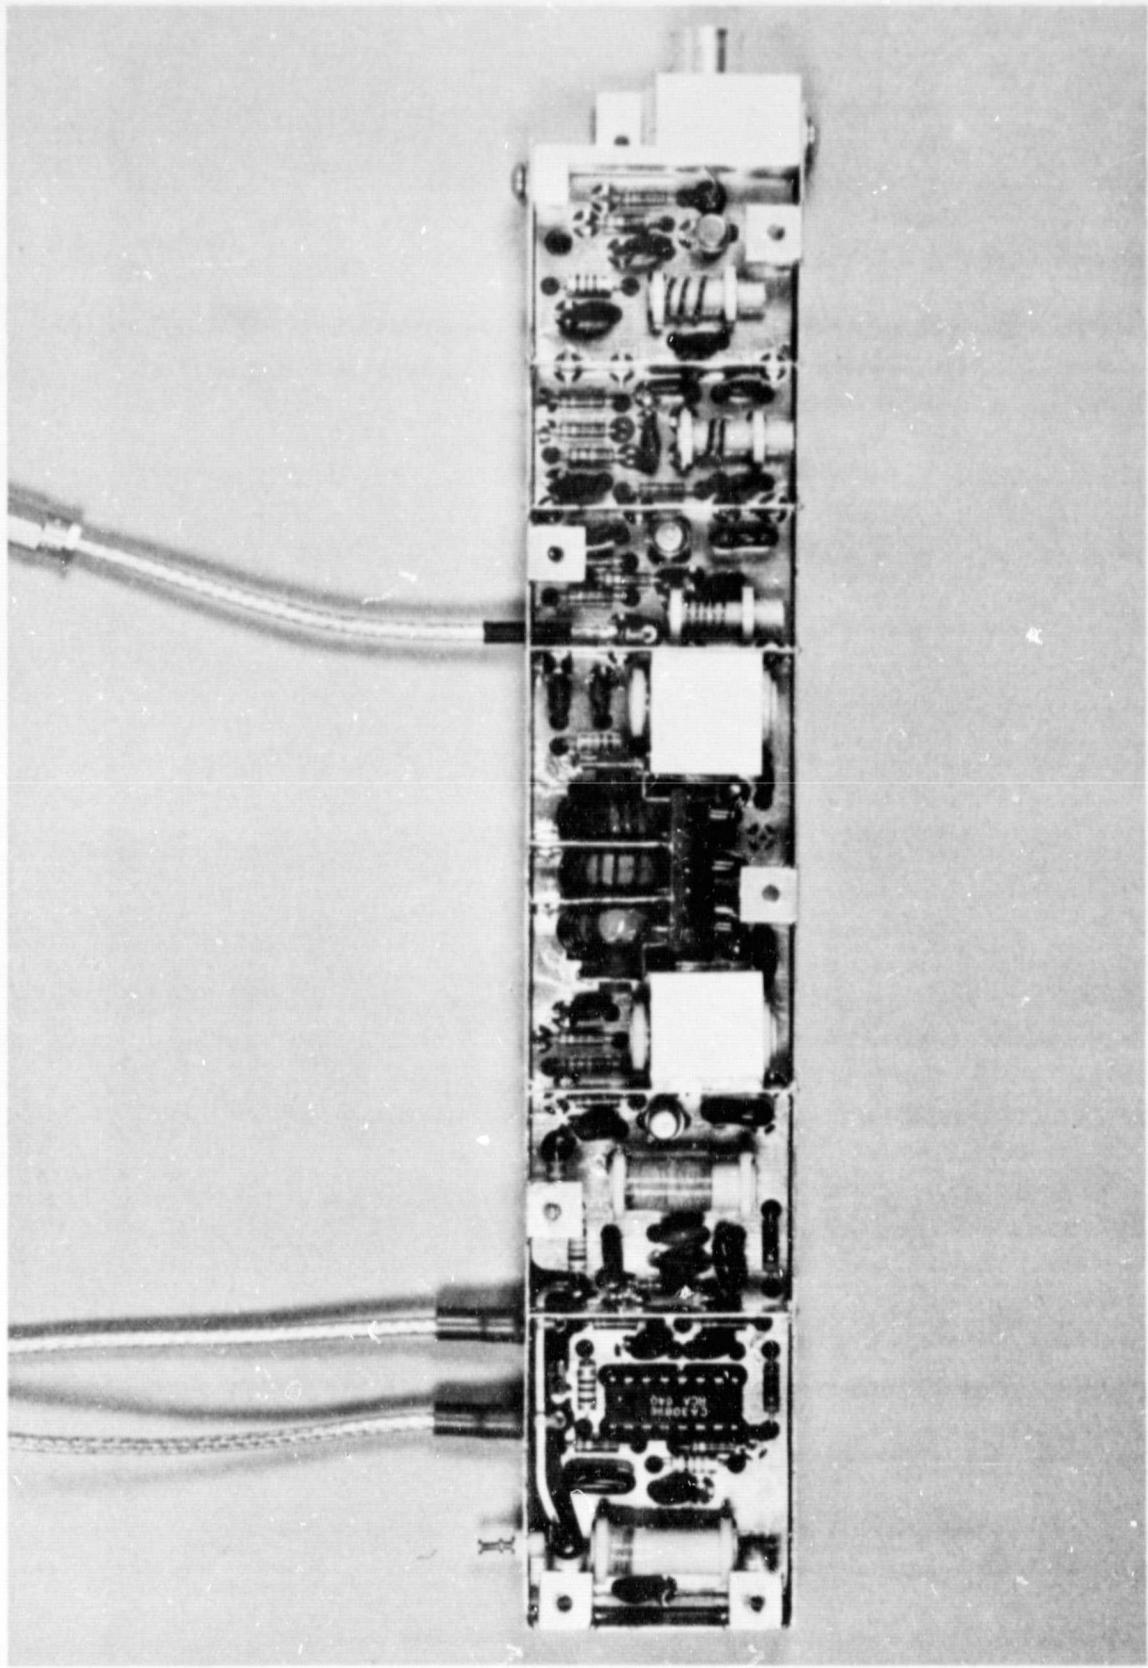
IF/DETECTOR ASSEMBLY TOP VIEW
